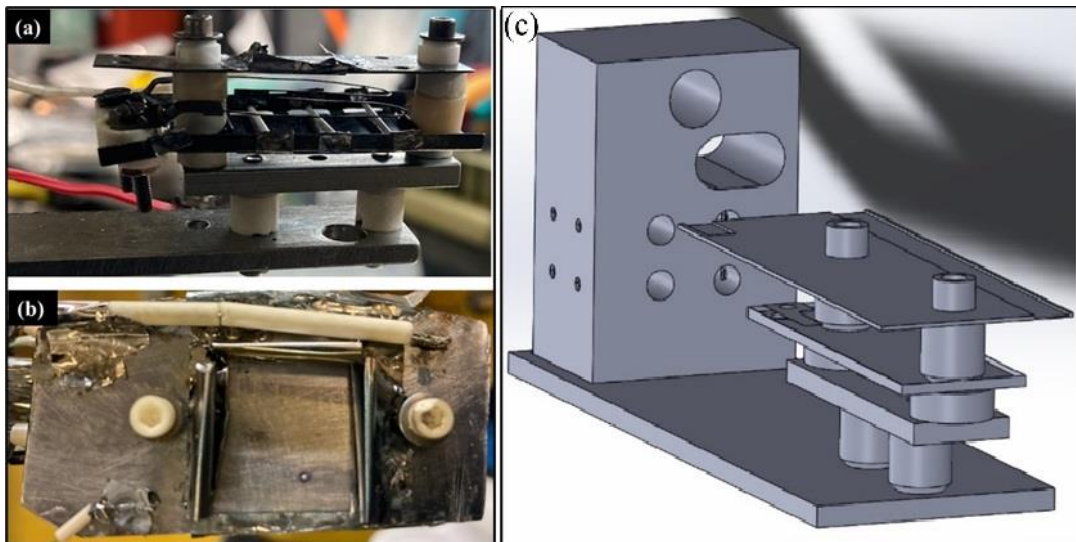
Heater assembly photo (a) side view and (b) top view; (c) SolidWorks drawing of the heater assembly and the wire routing aluminum block.
